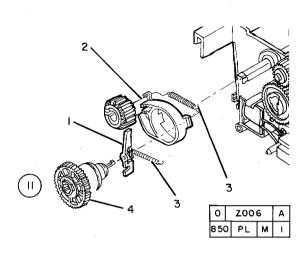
Entire Drawing With Tag Symbol.(0z006a)
